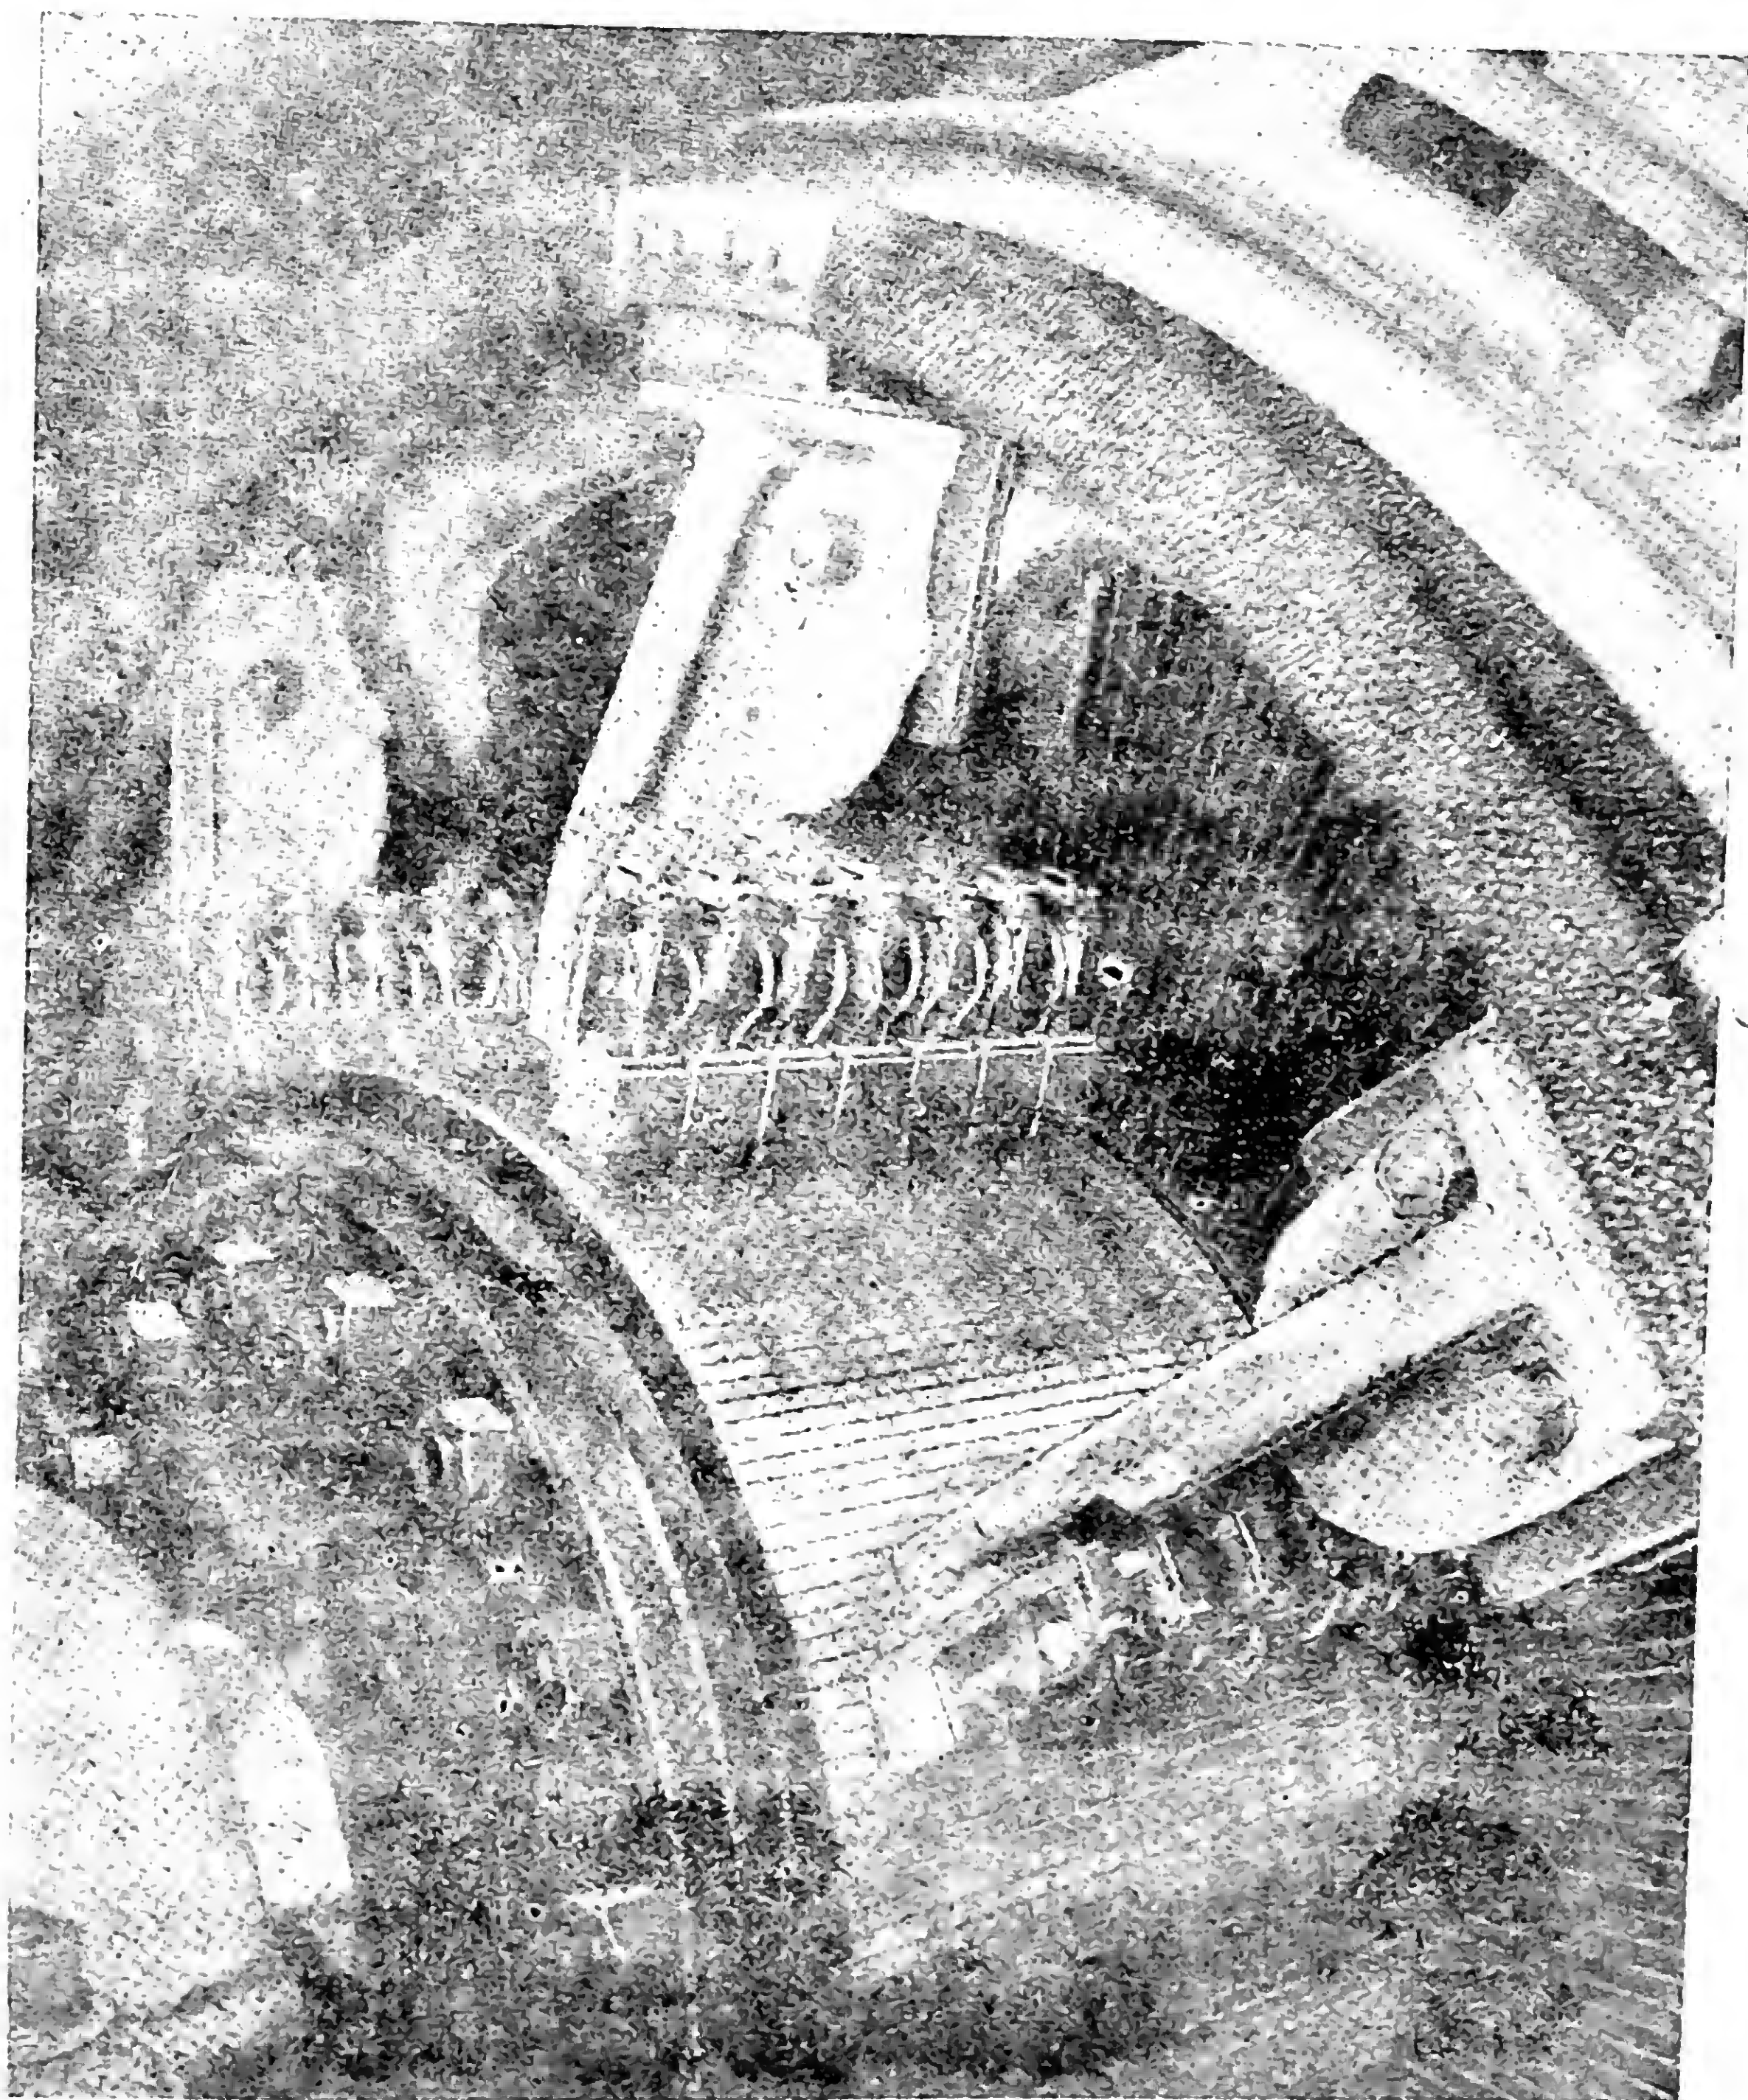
Part of Brush-Gear — 400 kW 8-Pole Machine
